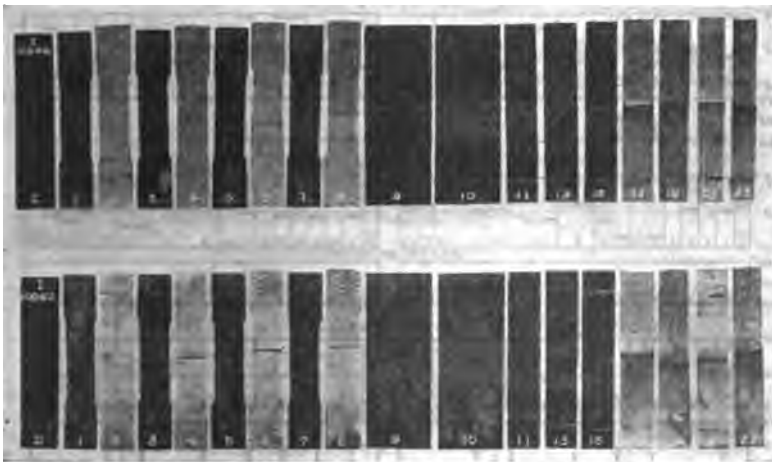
Showing manner of failure of tension and transverse test specimens, sections C and D, rail 10062. Specimens 1 to 8, inclusive, tension test specimens. Sections 9 to 23, inclusive, transverse test specimens.
